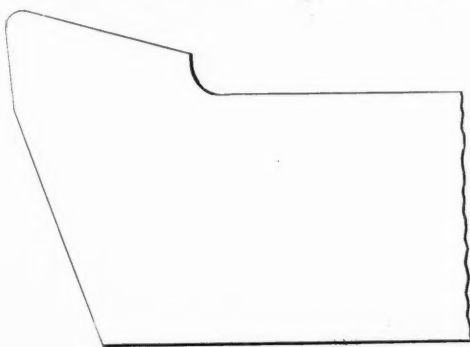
Showing how the Cutting Edge of Carbon Steel Tools sometimes Rounds Over.
